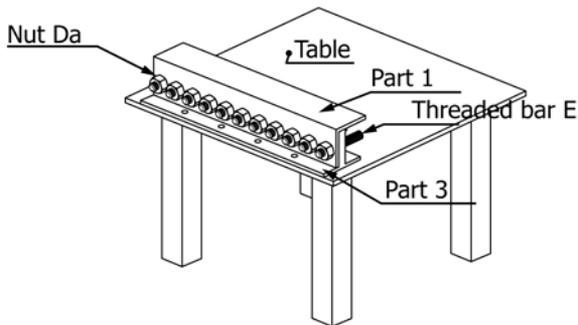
Part 1 Engaged to Part 3, Part 3 Bolted to the Table
